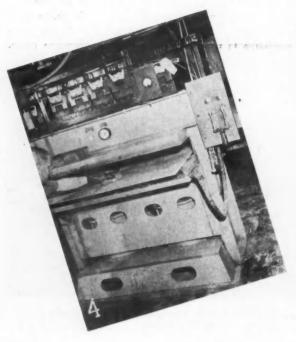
Proof-loader for 34-in. and 1-in. flashwelded tubes.
